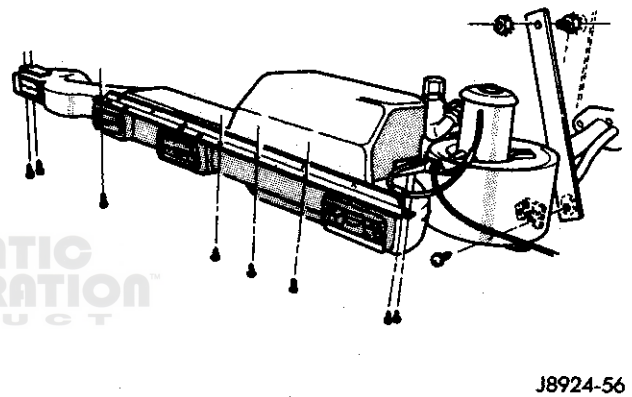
Remove Evaporator Housing Mounting Screws — SJ
